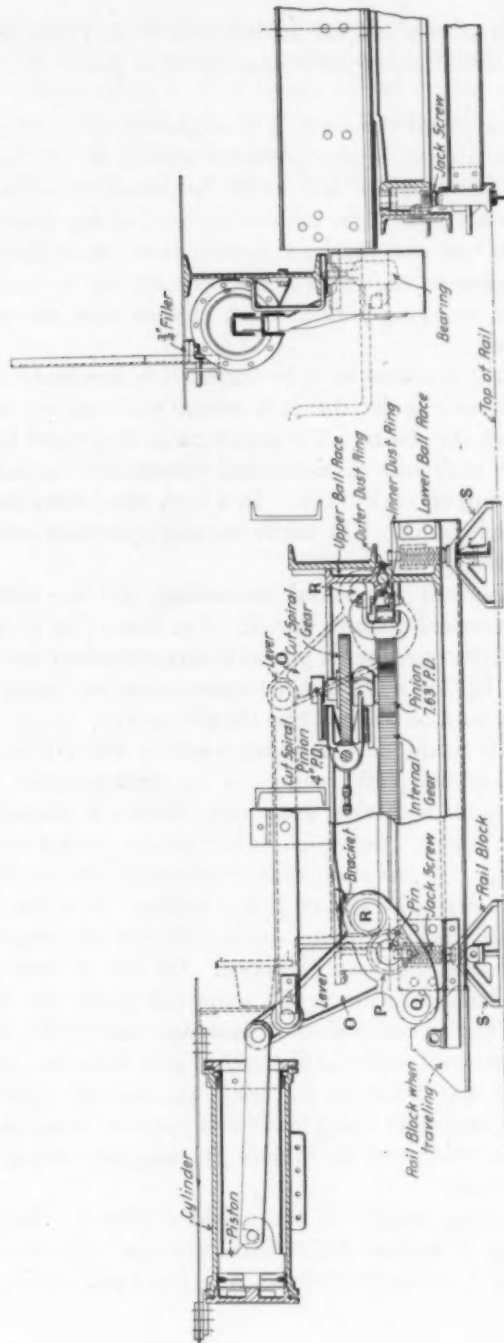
PLAN AND SIDE AND FRONT ELEVATION OF HYDRAULIC TURNTABLE OF LOCOMOTIVE PILE DRIVER
